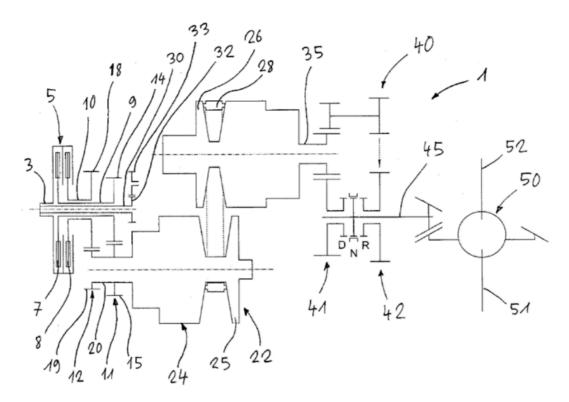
illustrates a combination of three mechanical gearings including a belt-type CVT 22, a toothed input gearing (11) and (12), and a forward-reverse output unit (40). Forward-reverse output unit (40) includes reversing gear (42).
